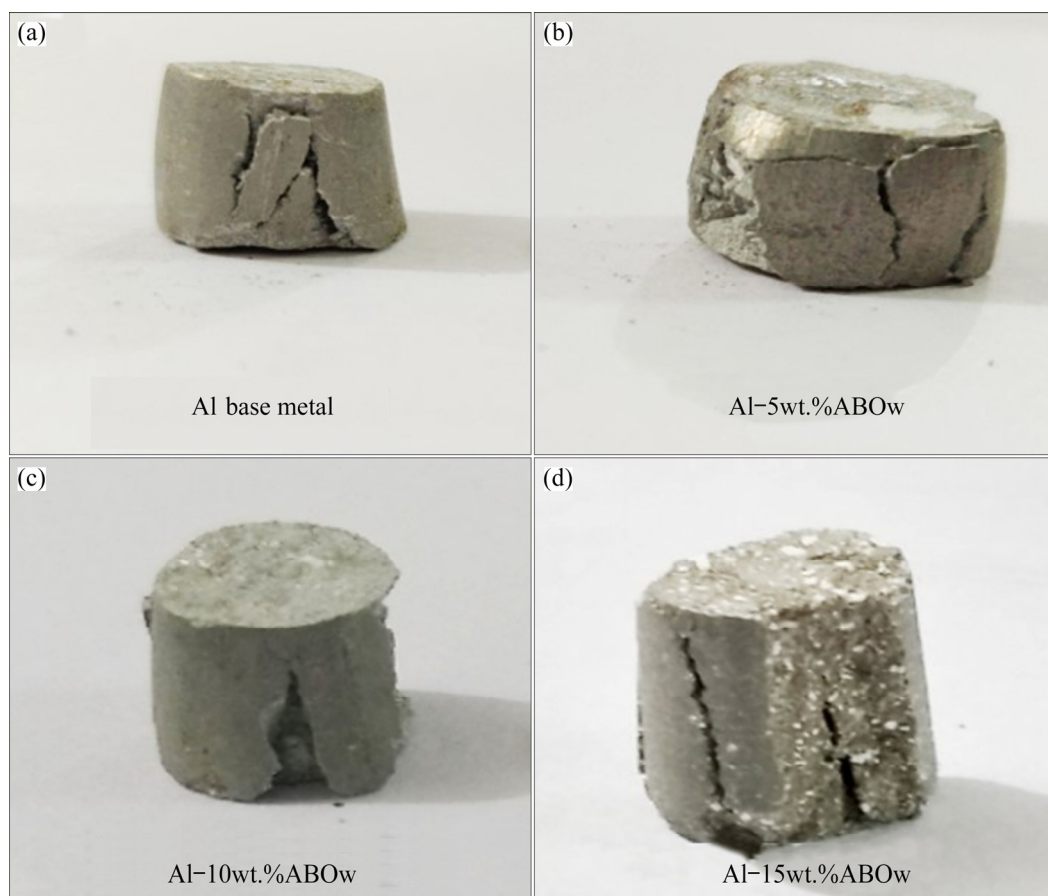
Macrographs showing longitudinal surface cracks during compressive failure of aluminium base metal (a) and sintered Al-ABOw composites (b–d)
